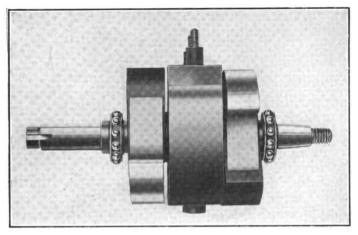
Showing the Stationary Winding Between Laminated Steel Inductors, Inductor Shaft and Ball Bearings.
